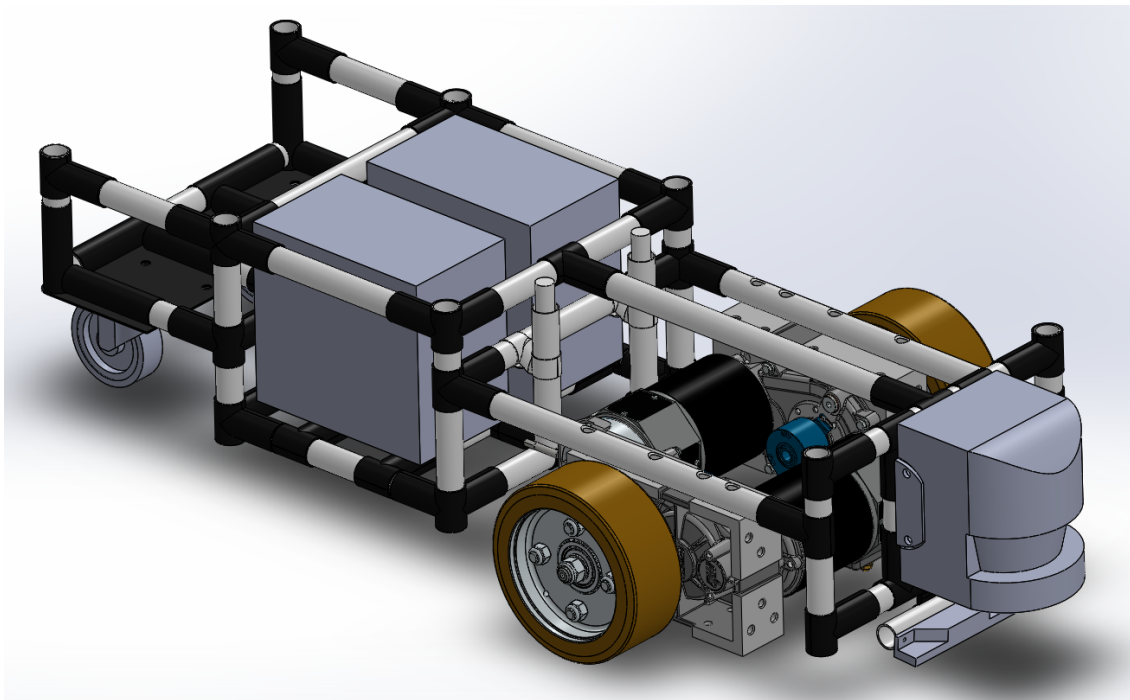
Two drive wheels configuration, AGV 3D model perspective view
